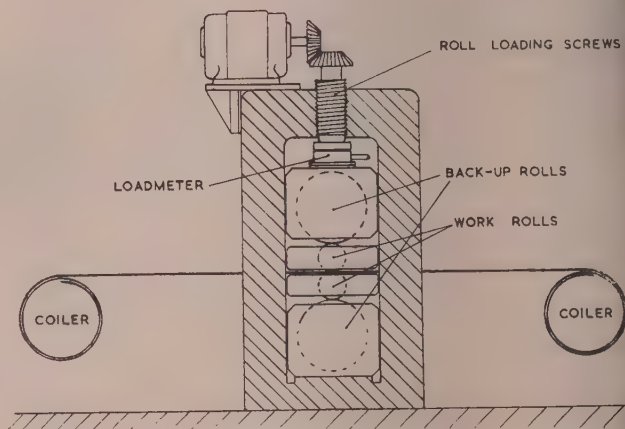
Arrangement of the 14 in four-high reversible cold rolling mill.
